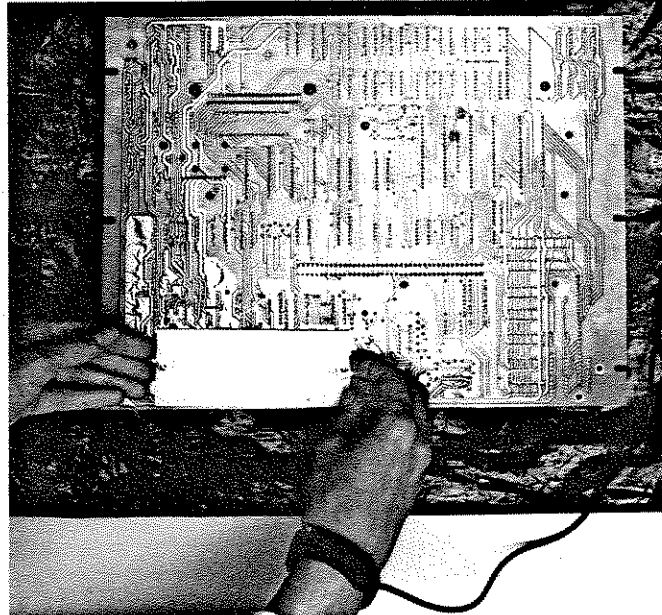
Removal of the shield from below the test fixture. Notice the use of a personnel grounding strap.
